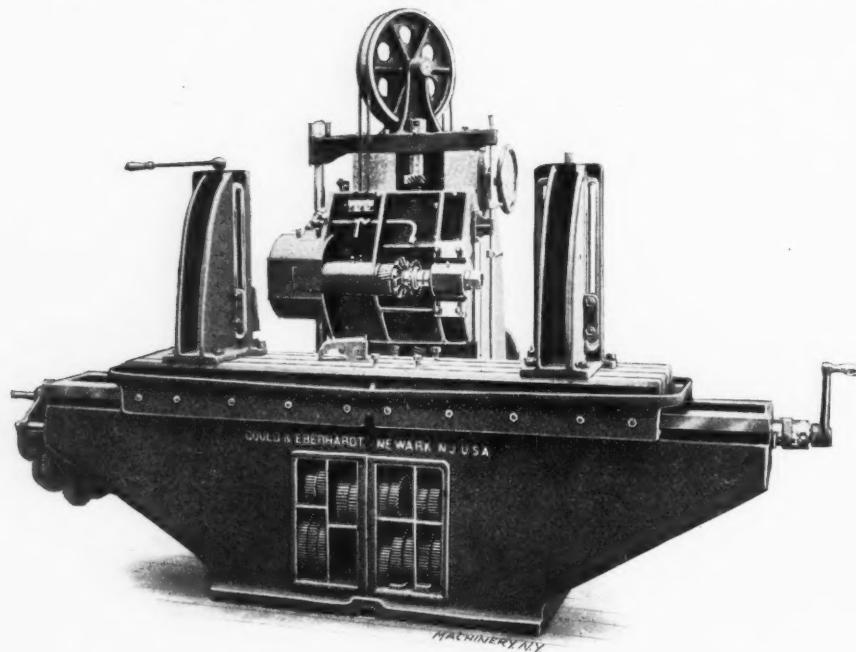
A New Design of the Gould & Eberhardt Rack-cutting Machine.
